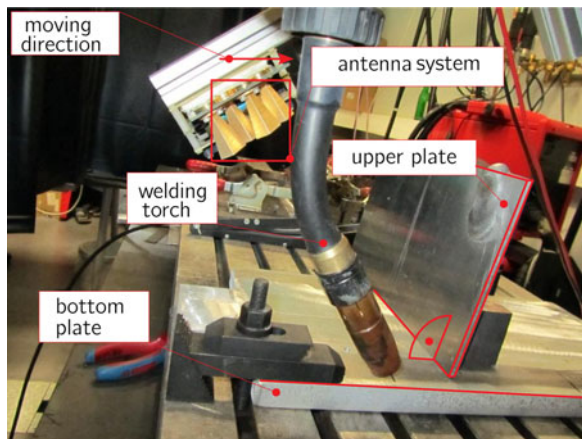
Photograph of the measurement arrangement of the T-joint. The radar prototype is mounted on the welding robot, and the antenna system is focused in the direction of the T-Joint.
